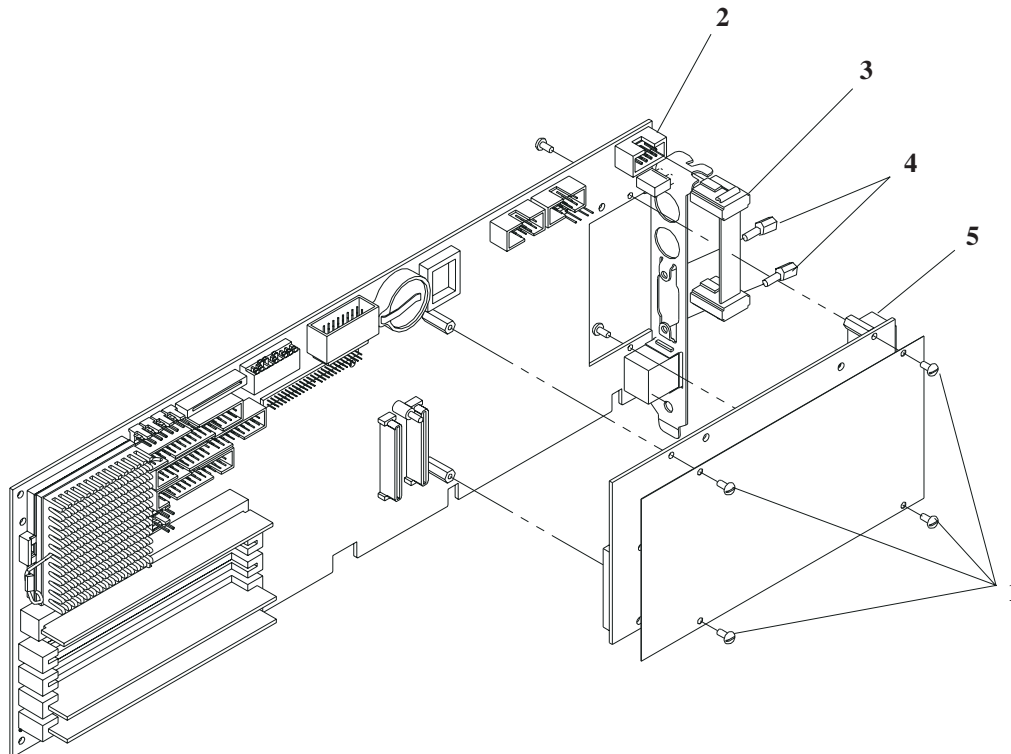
Removing and Replacing the Analog Video PMC Form Factor Card or Keyboard/Mouse Cable
